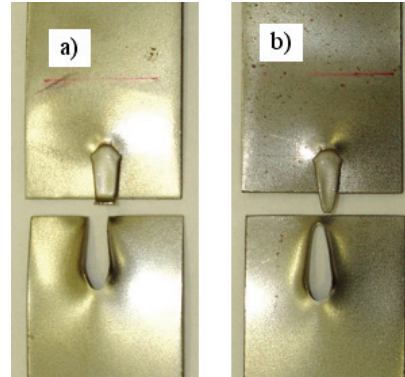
The example of the spot welding joint material separation: a) DD13 ($t_t = 0.8/t_b = 0.8$), b) DX53D+Z / DD14 ($t_t = 0.98/t_b = 0.8$)
